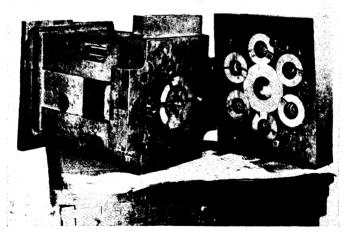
Assembly of the die components shown in the previous two illustrations. This assembly then is mounted on the casting machine.
